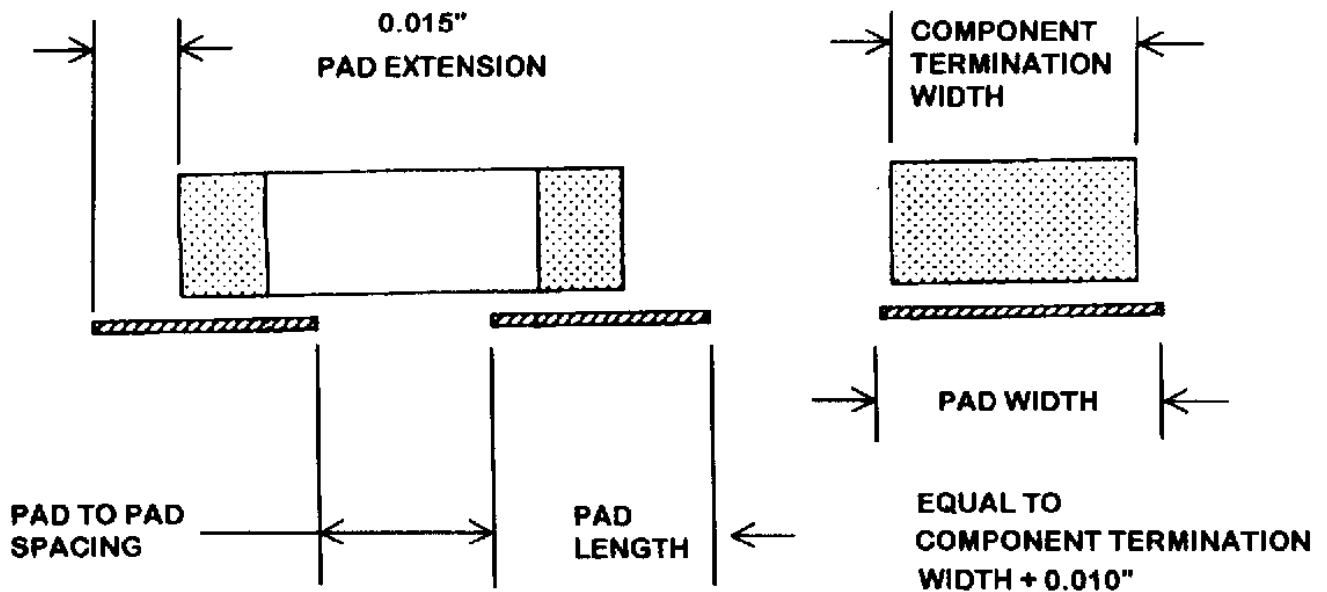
SOLDER PADS FOR 0402 CHIP COMPONENTS
